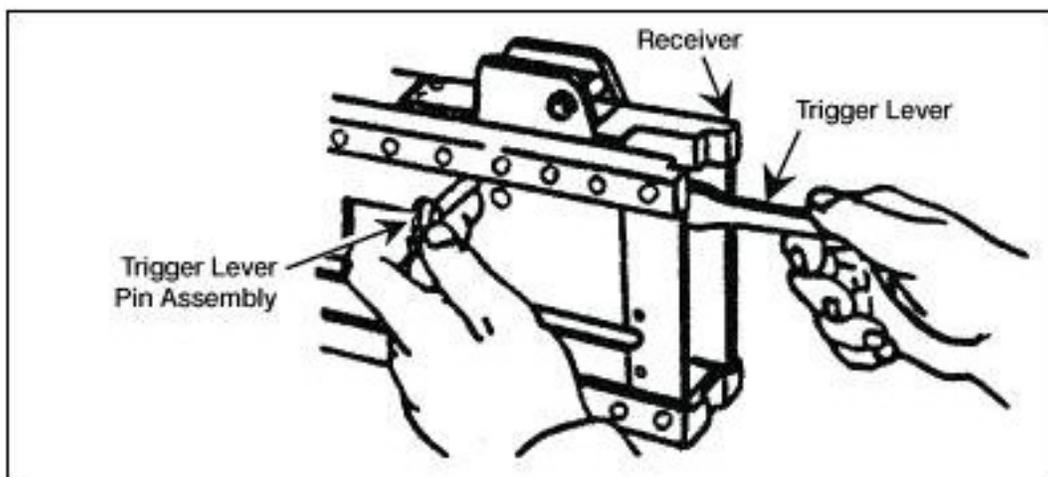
ST-1025_22 (Removal of the trigger lever pin assembly and trigger lever)
